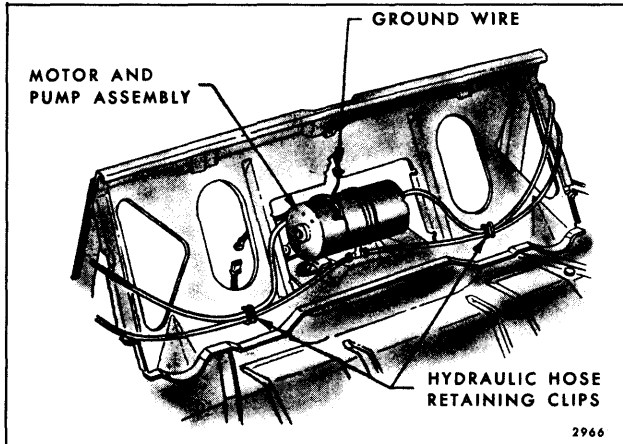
Motor and Pump Installation "A" Styles Shown
